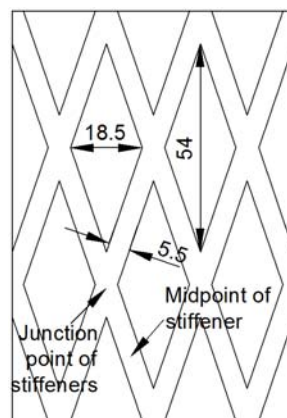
Checkered sheet pattern used to produce specimens (dim. in mm)
